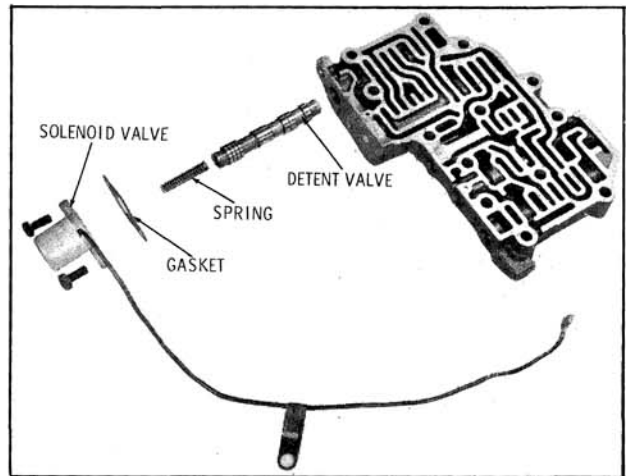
Removing Detent Solenoid and Detent Valve
